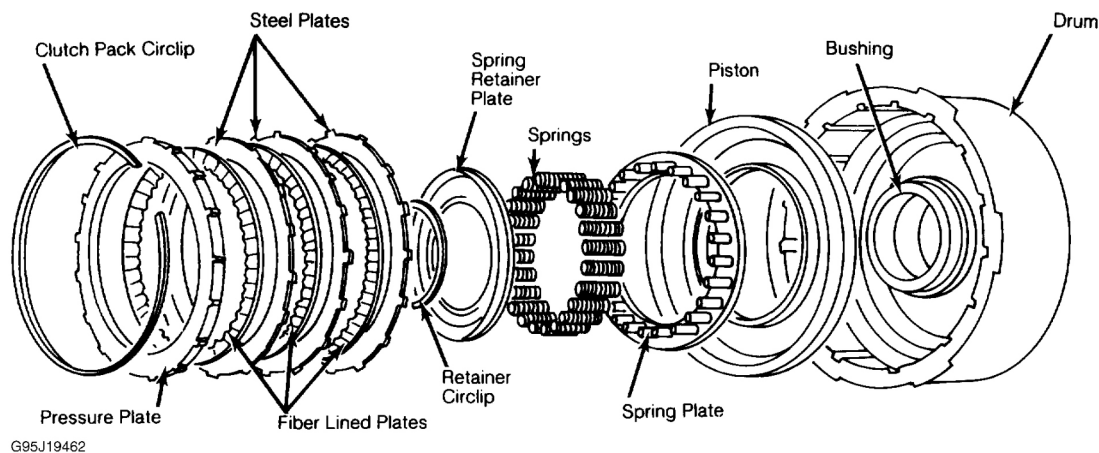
Exploded View Of Direct-Reverse Clutch Assembly
